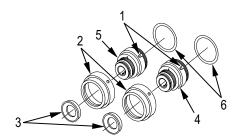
Optical Eyepiece Assembly, 93143-108-1.
